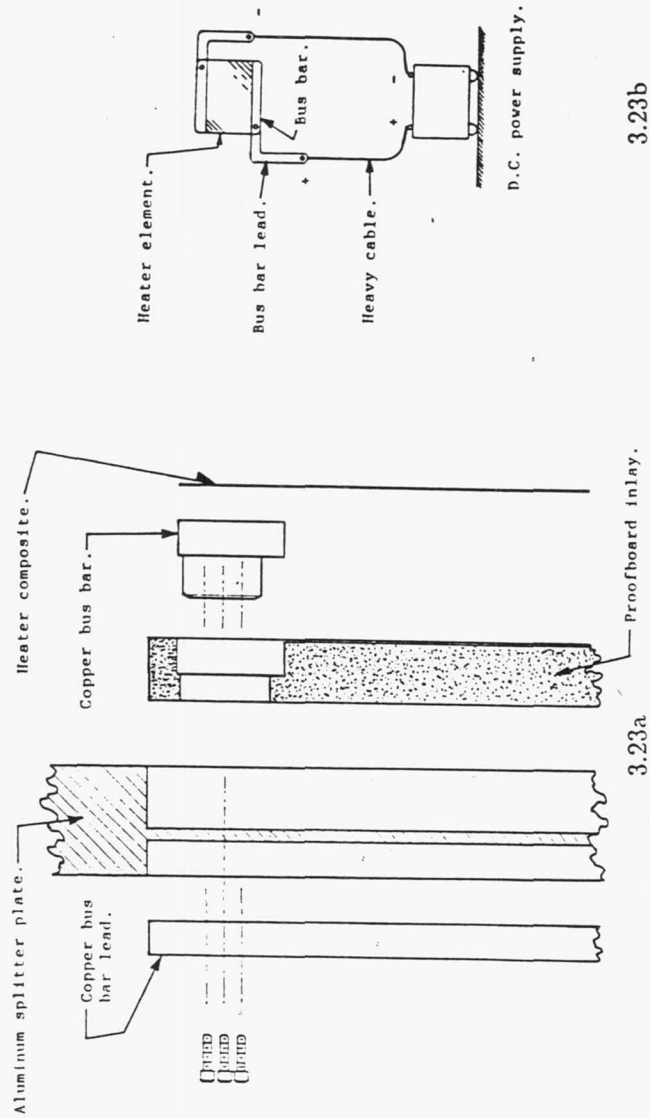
Assembly drawing of the heater showing plate, heater composite, insulated base, and copper bus bars.
